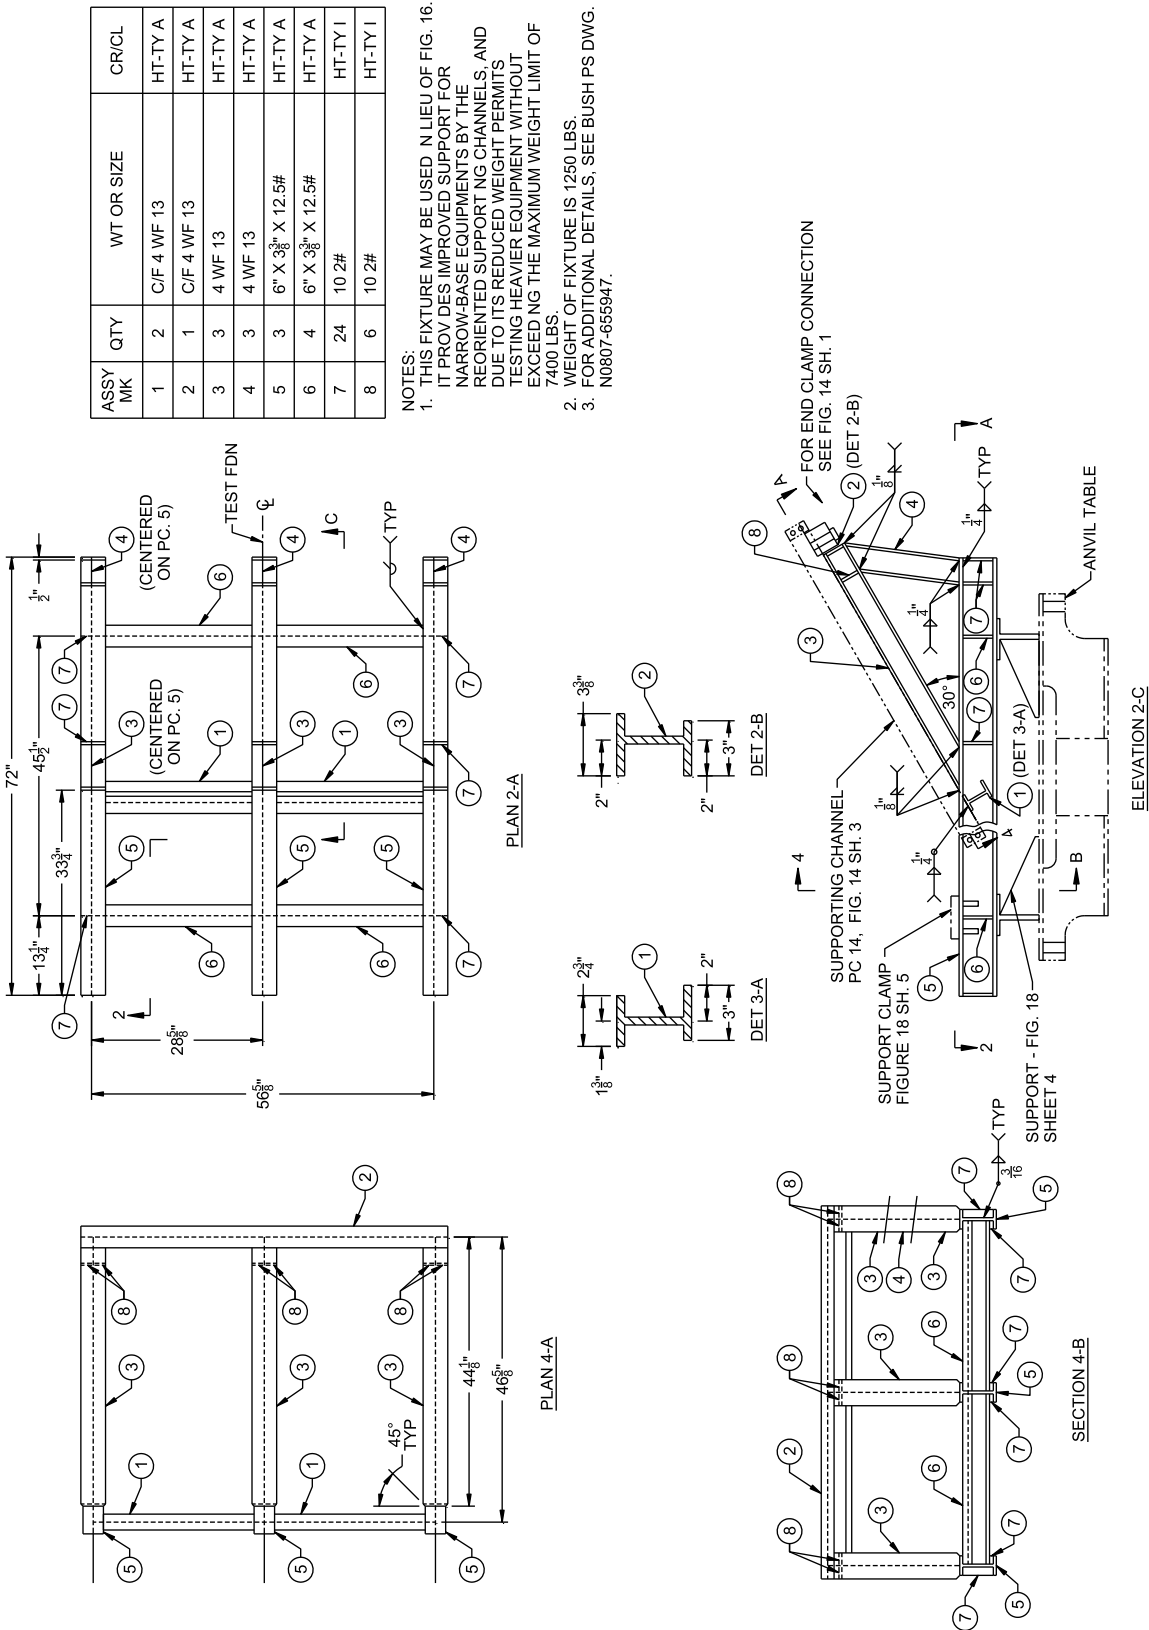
Alternate 30-degree mounting fixture for testing base mounted equipment on the MWSM.
